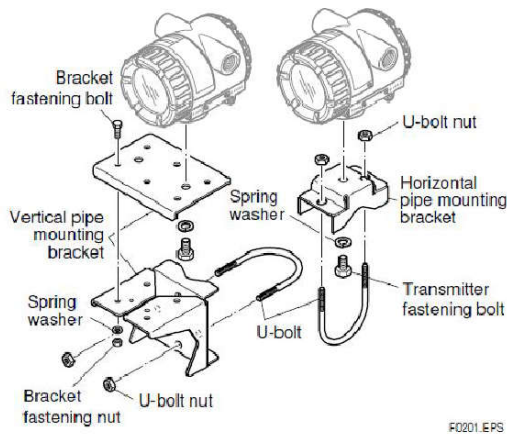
Transmitter mounting parts (图2-5)^[2]
